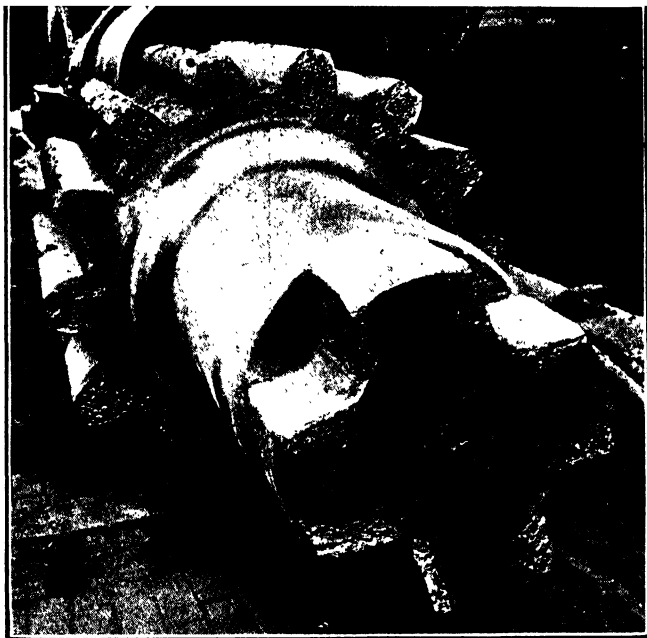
A.—HEAVY ROLLING MILL PINION: WORN PARTS RE-BUILT.
